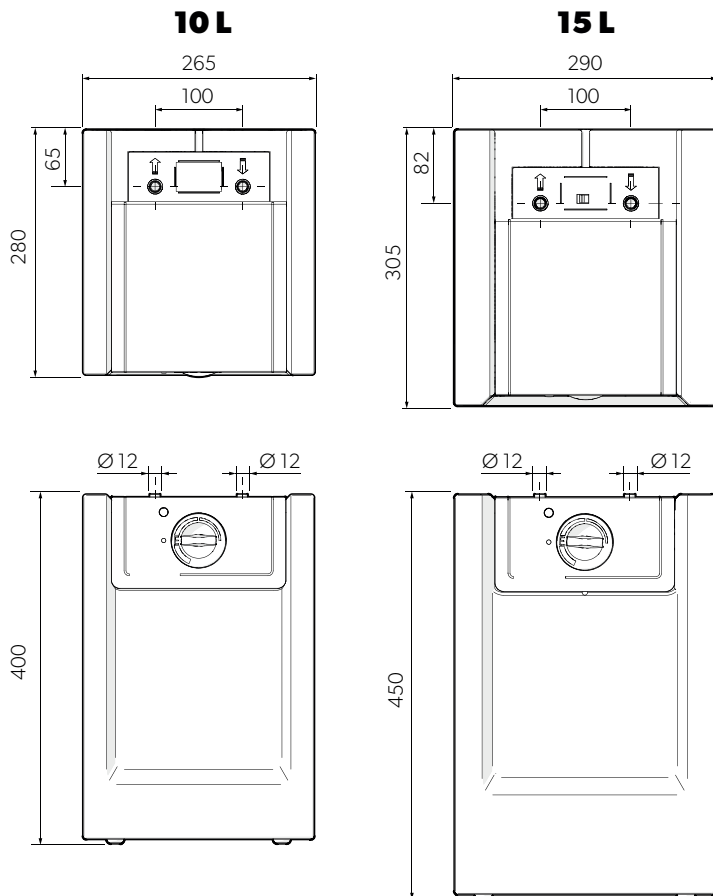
Technical drawing Inovario 10 (Hotfill) and 15
